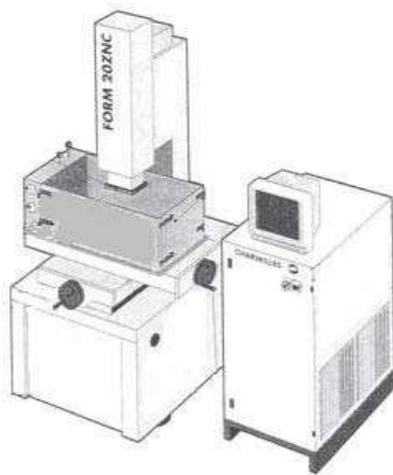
EDM machine with a thick electrode type FORM 20ZNC [4]
